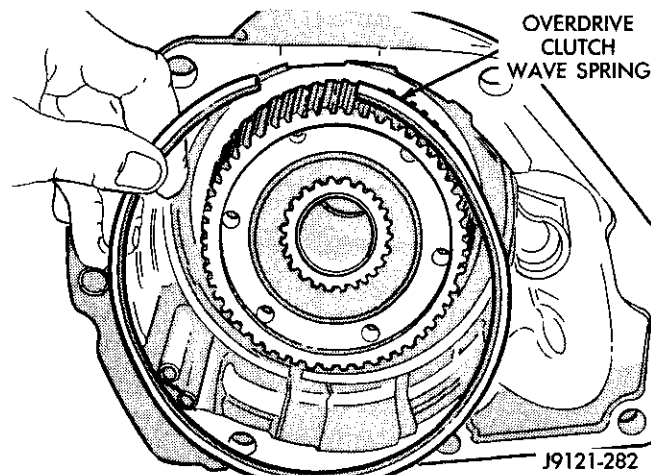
Removing/Installing Overdrive Clutch Wave Spring
